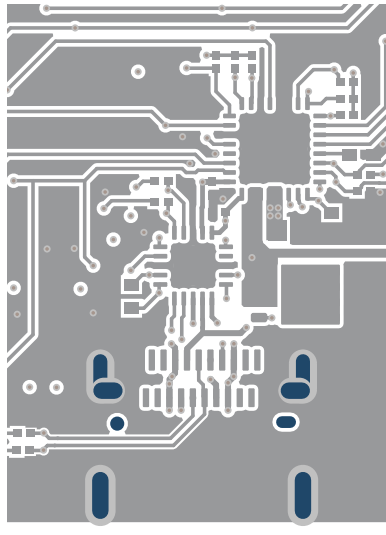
TPS26750 PCB Layout - Top Layer 1
